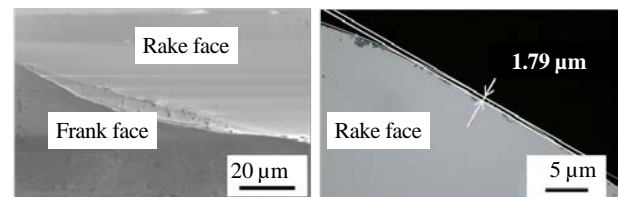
Tool wear of diamond cutting tool (800 mm/min)
